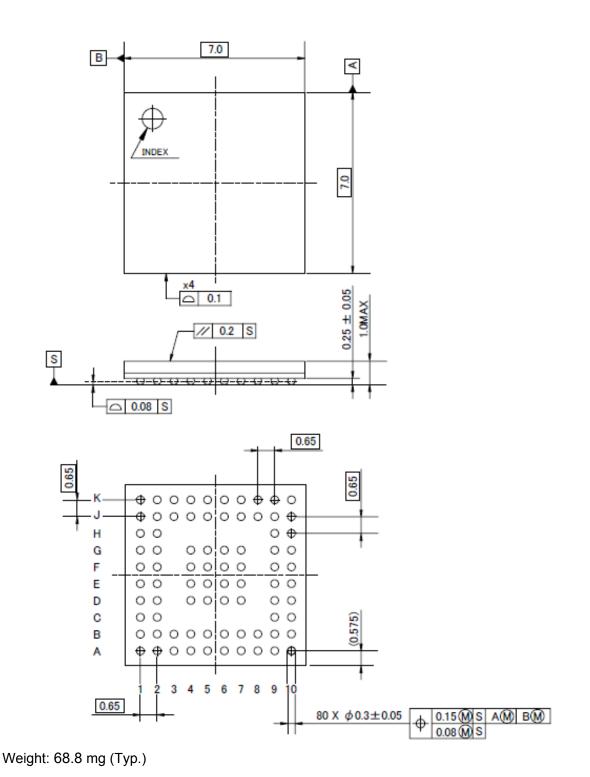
TC358748XBG P-VFBGA80-0707-0.65-001 package
